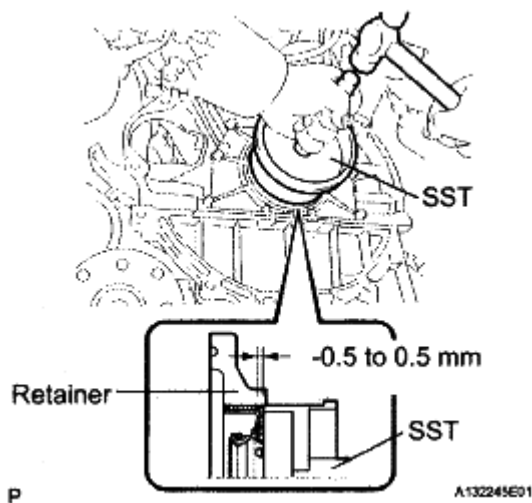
Tapping In Engine Rear Oil Seal Using SST & Hammer
